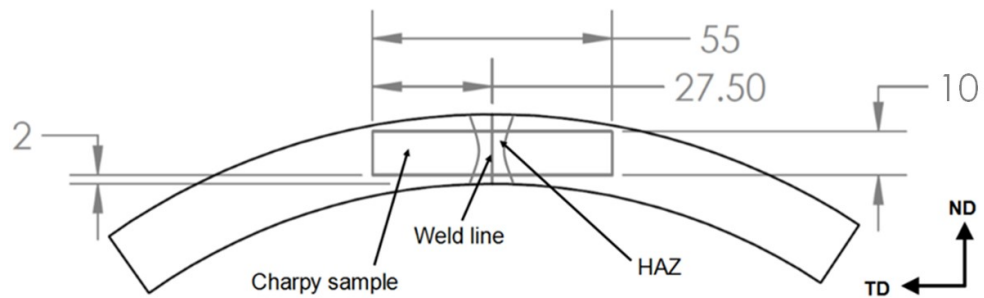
Location that Charpy impact specimens were machined from pipe segments (dimensions in mm).
